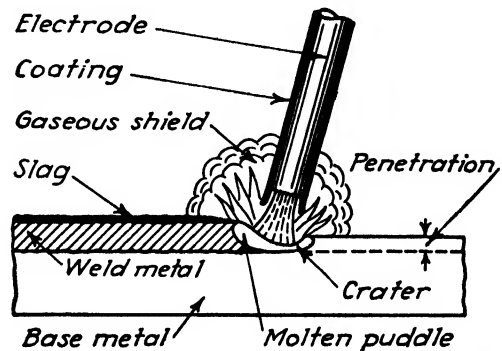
Arc welding with shielded or coated type of electrode.
